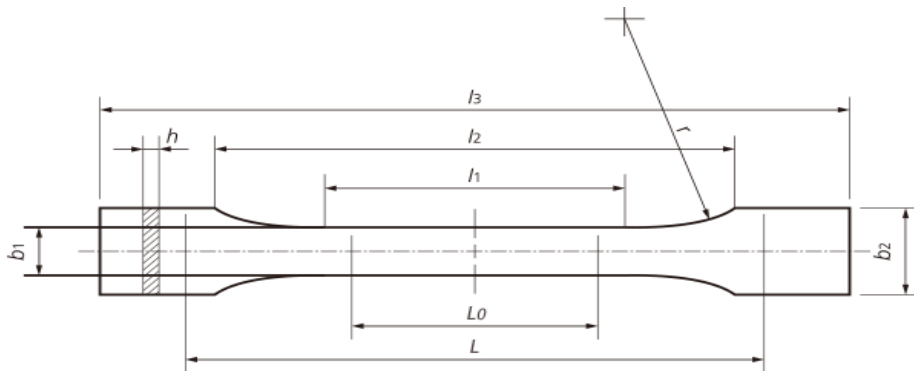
ISO 527 PVC specimen dimension for tensile test
